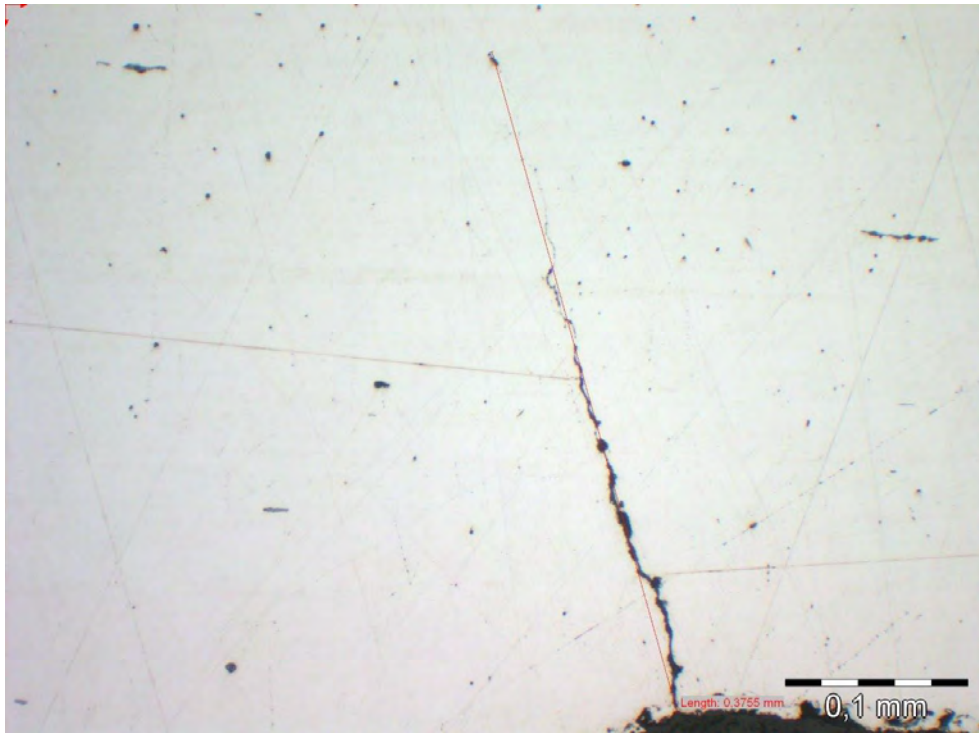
Crack at segment A, second ridge on barrel no. SFK 0120-A
